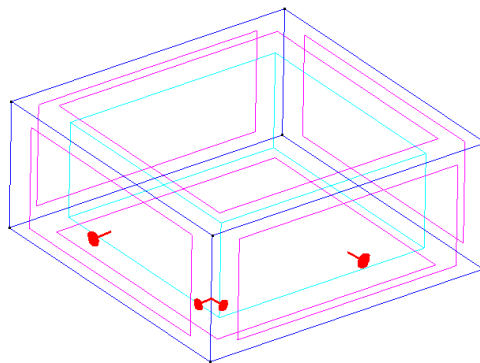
Proper Support Assignment at the Edge of Two Surfaces
